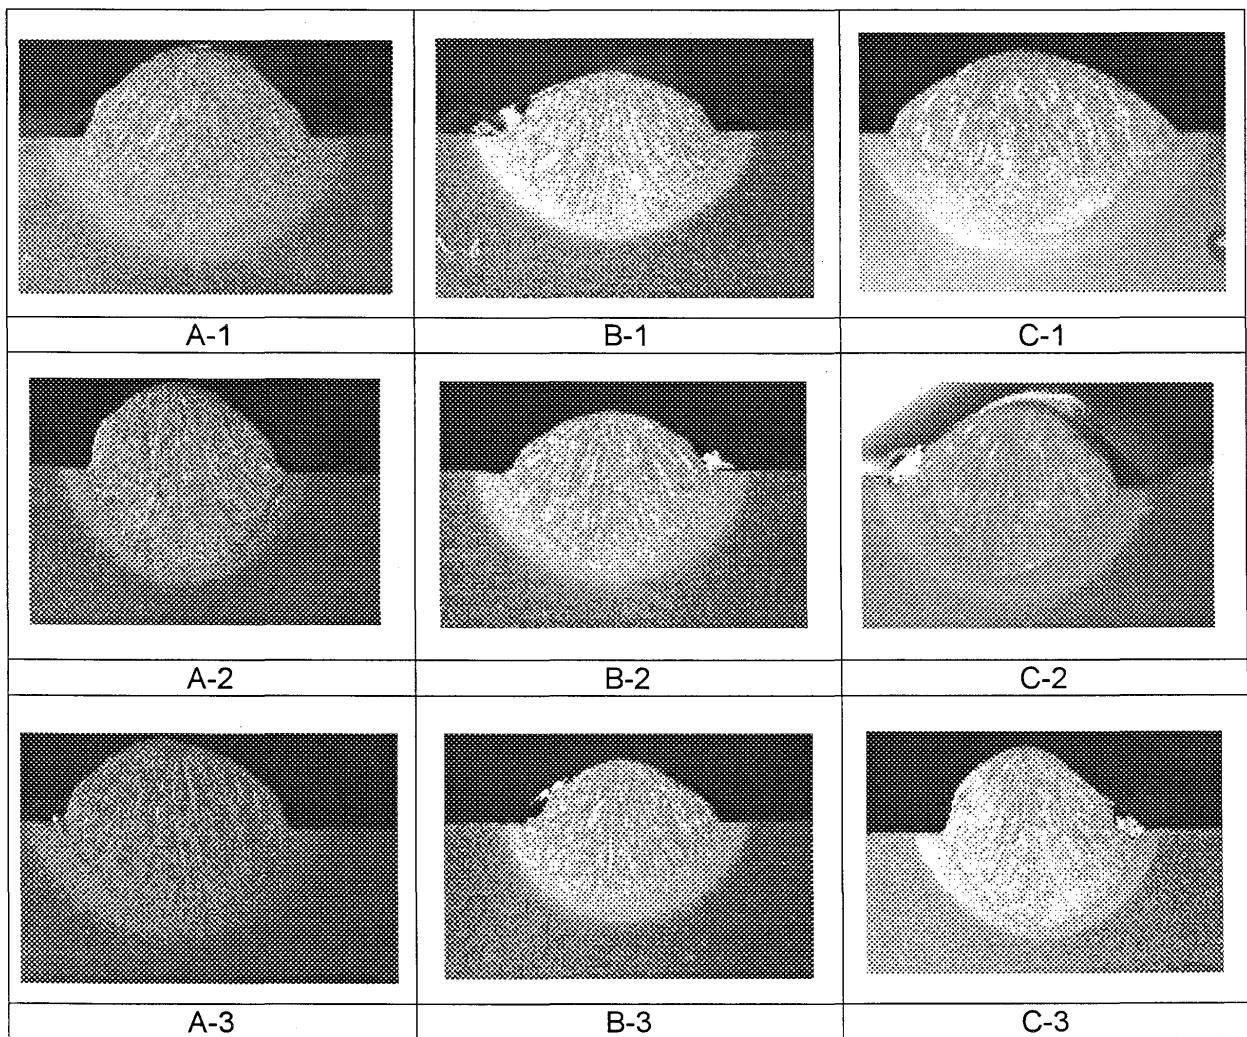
Macrostructure of the investigated samples at different welding parameters and shielding gases.
